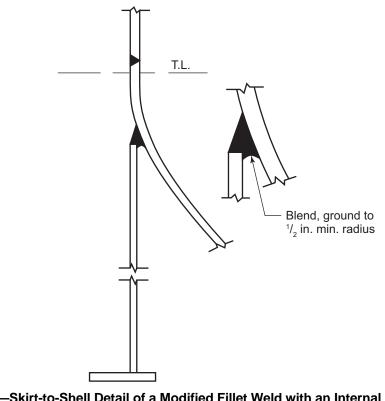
Skirt-to-Shell Detail of a Modified Fillet Weld with an Internal Weld Crotch Radius to Reduce Stress at the Weld
